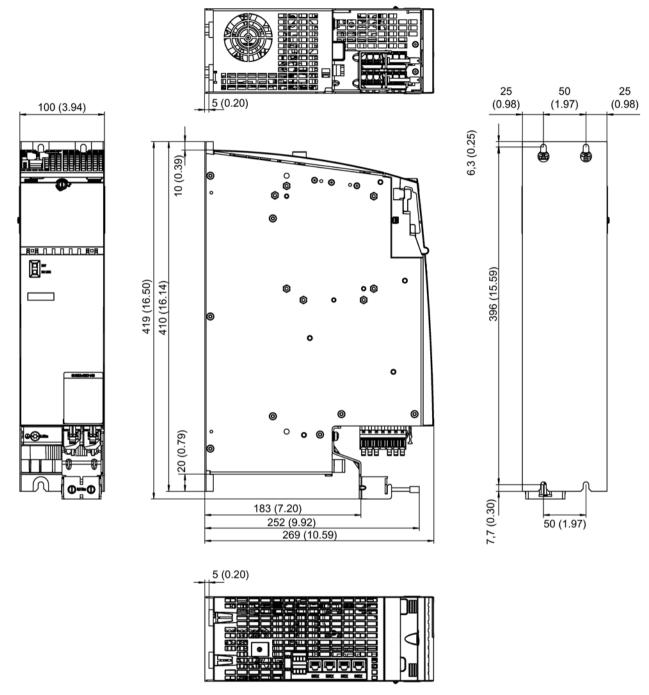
Dimension drawing of 100 mm Motor Modules 30 A / 2 x 18 A in Booksize format C/D type with internal air cooling, all dimensions in mm and (inches)
